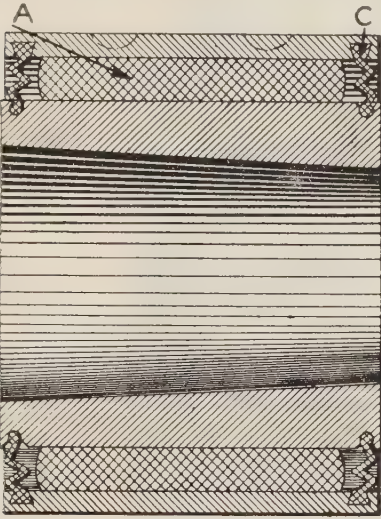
Section of a silent-bloc, Repousseau type, set in each rod joint (see figs. 25 and 29).
